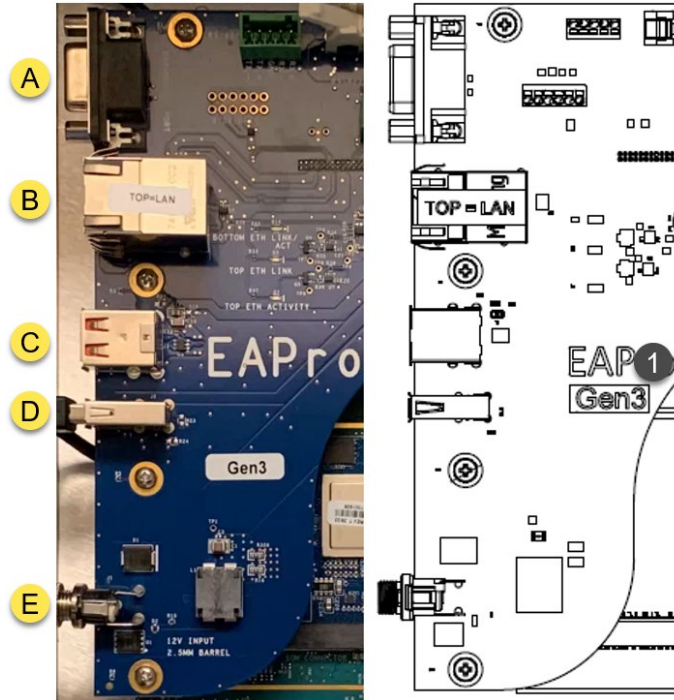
EAPro (191F0310) Left-side Connections, Top to Bottom Detail
